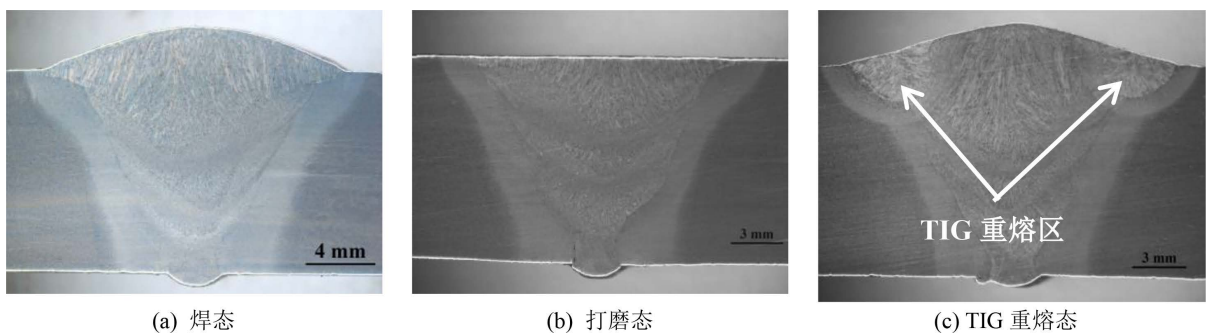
Macroscopic morphology of welding joints under different post-welding treatment conditions
